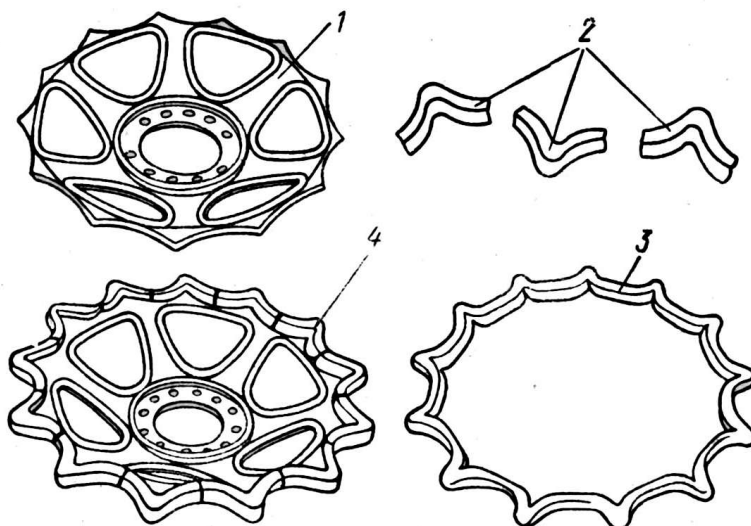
Restoration scheme of drive wheel by welding of sectors: 1 – drive wheel; 2 – sectors; 3 – sprocket; 4 – remanufactured part
